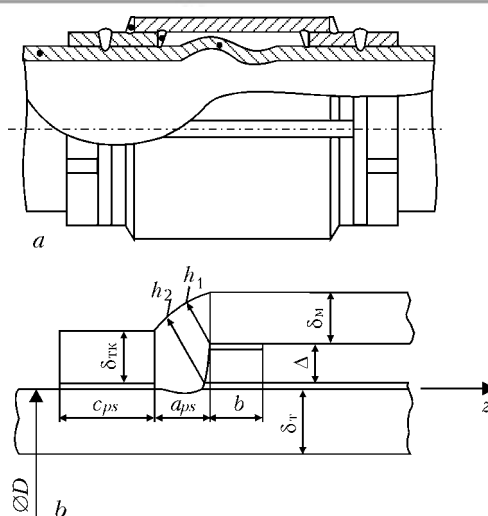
Principal scheme of construction of pipe sleeve with filler (a) and its welded joint (b)
